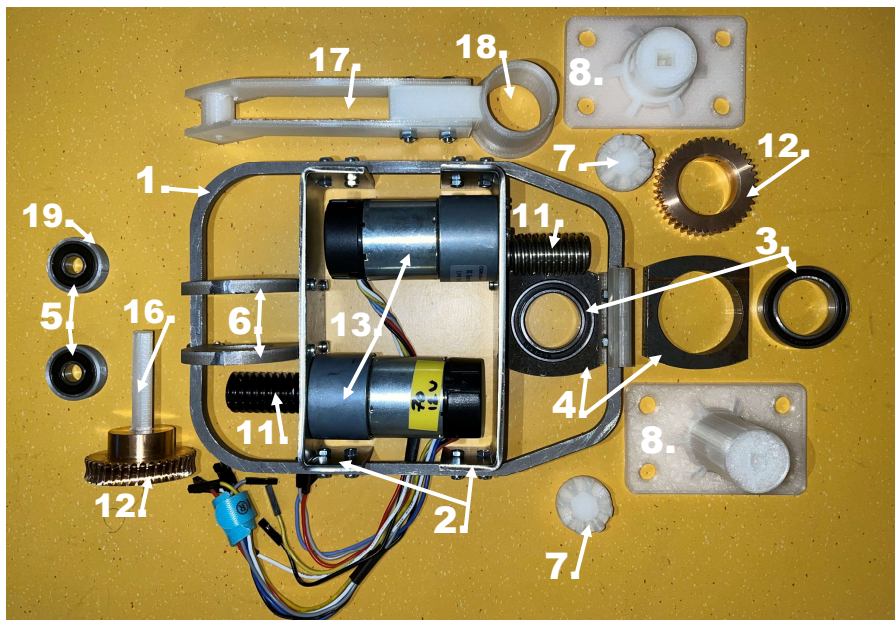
Exploded view of the final prototype with pointers according to the BOM.
